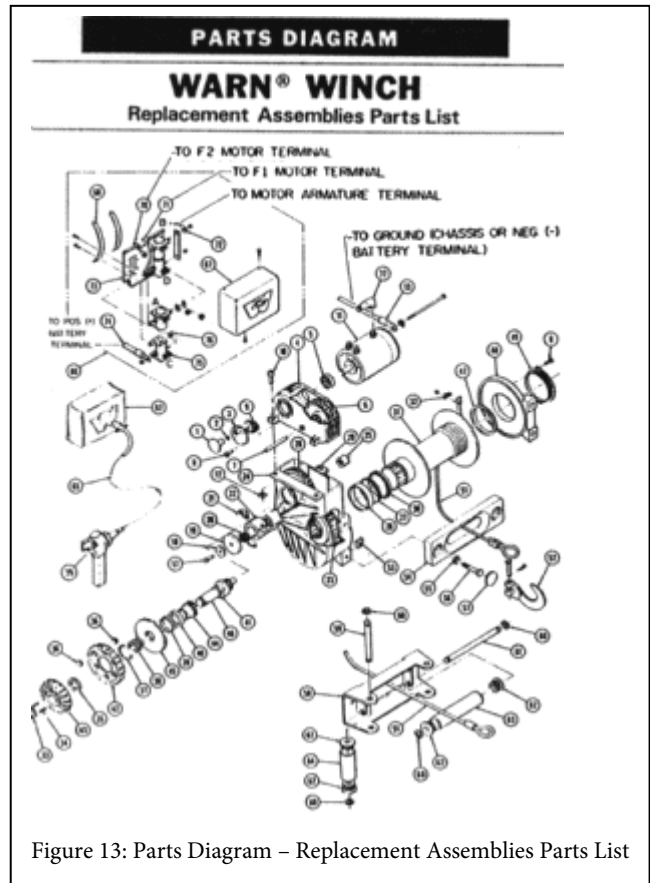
Parts Diagram - Replacement Assemblies Parts List
